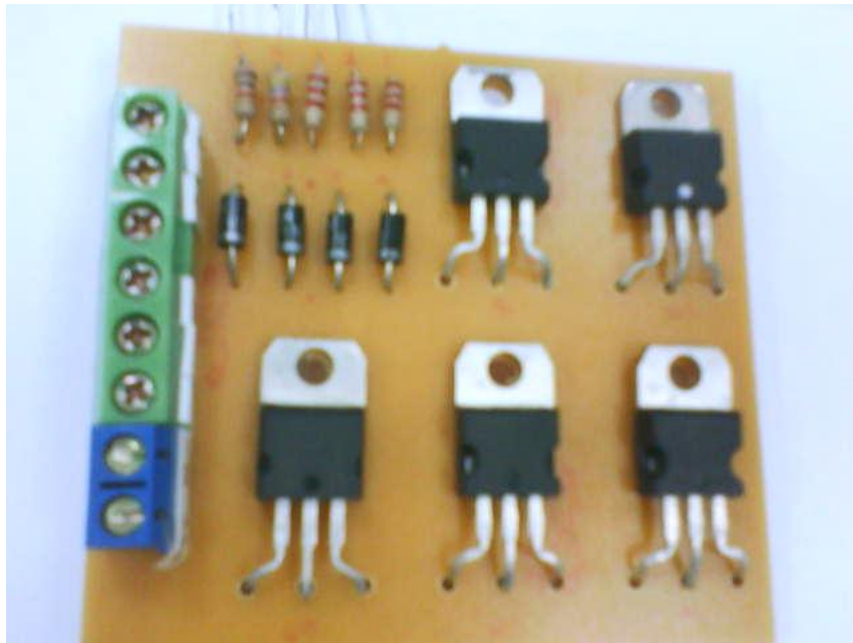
Testing on PCB board using transistor TIP 142(NPN channel)
